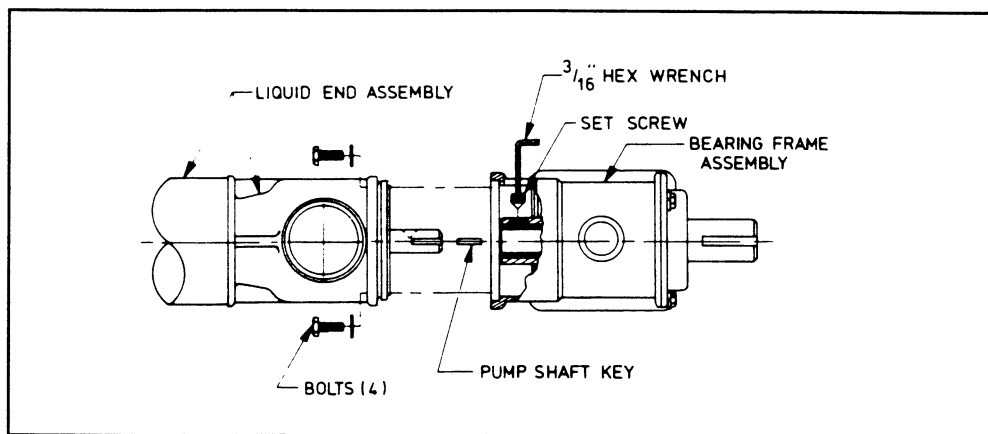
SEPARATION OF LIQUID END FROM BEARING FRAME
